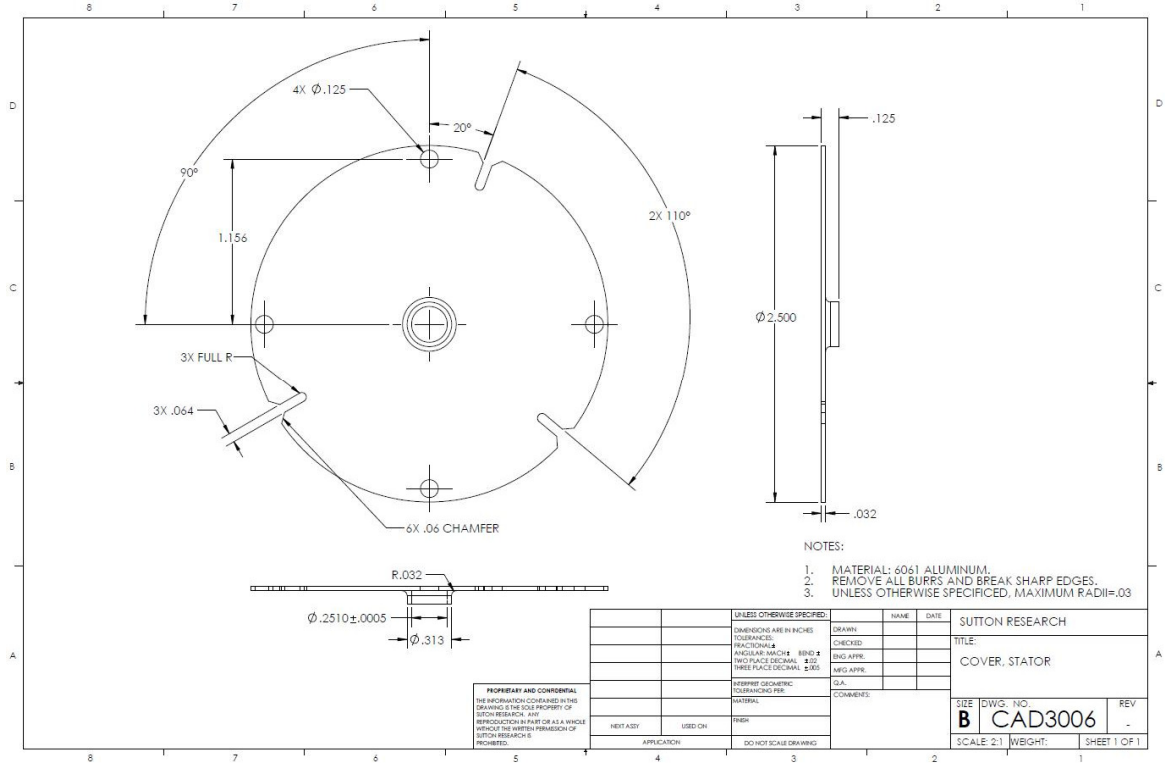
Cover, Stator Drawing. This figure details the stator cover for the permanent magnet machine built and tested for experiments 3 and 4.
